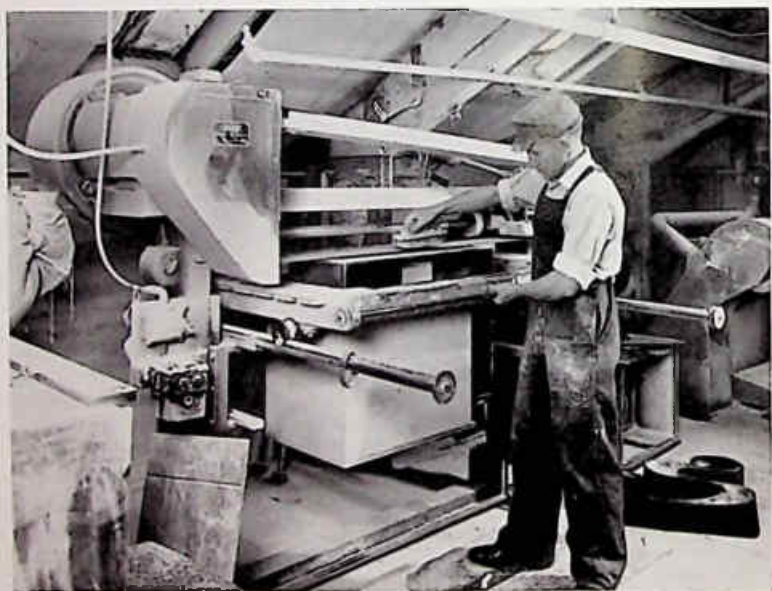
/4. *Sanding Polyester-sprayed cabinets before burnishing.
